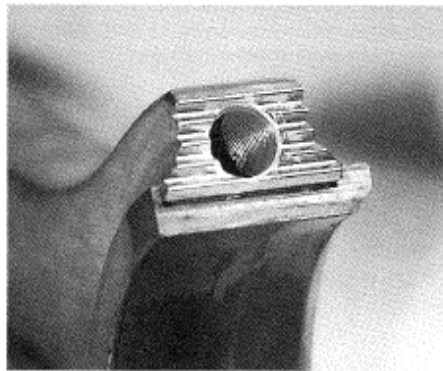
Serrated parting surface of an angled journal bearing cap.
